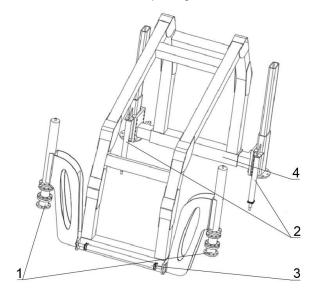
The ground clearance adjustment and wheel spacing adjustment mechanism
